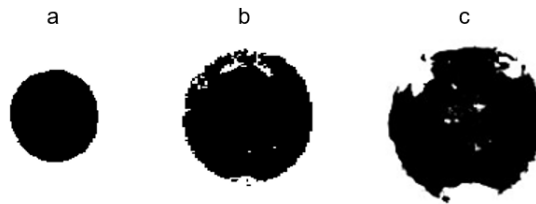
Electrode tip shape as obtained from the carbon imprint tests at a) 0 welds, b) 600 welds, c) 1200 welds.
